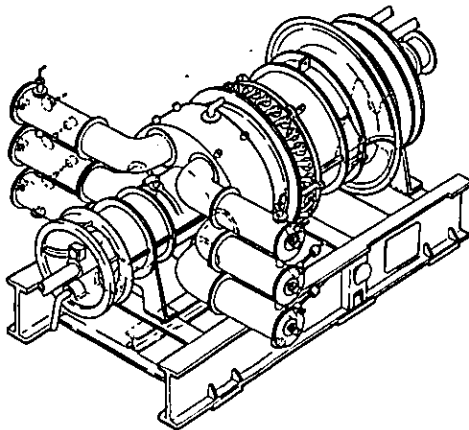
HEAVY DUTY GAS TURBINE G3124J
